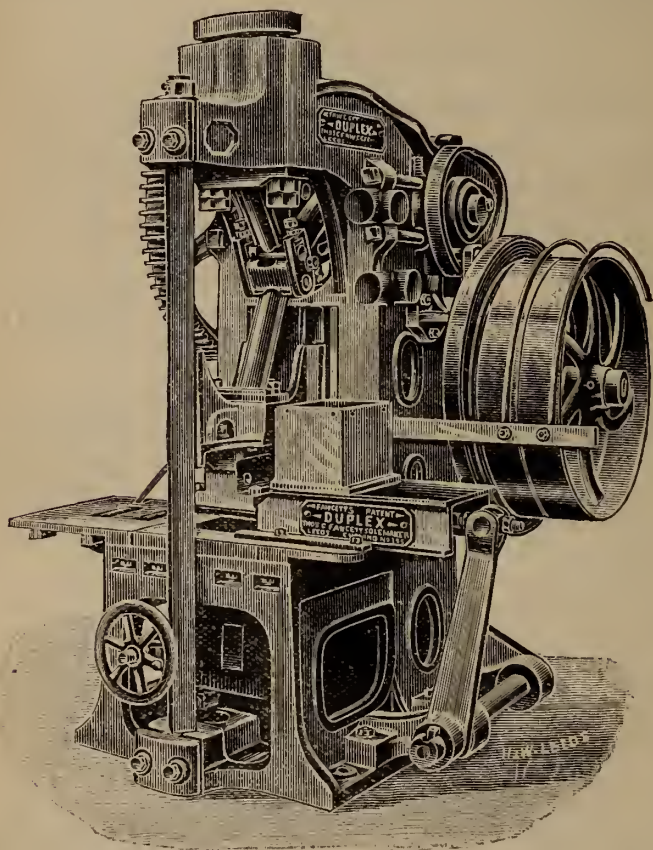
Fawcett's Brick and Tile Making or Pressing Machine.
